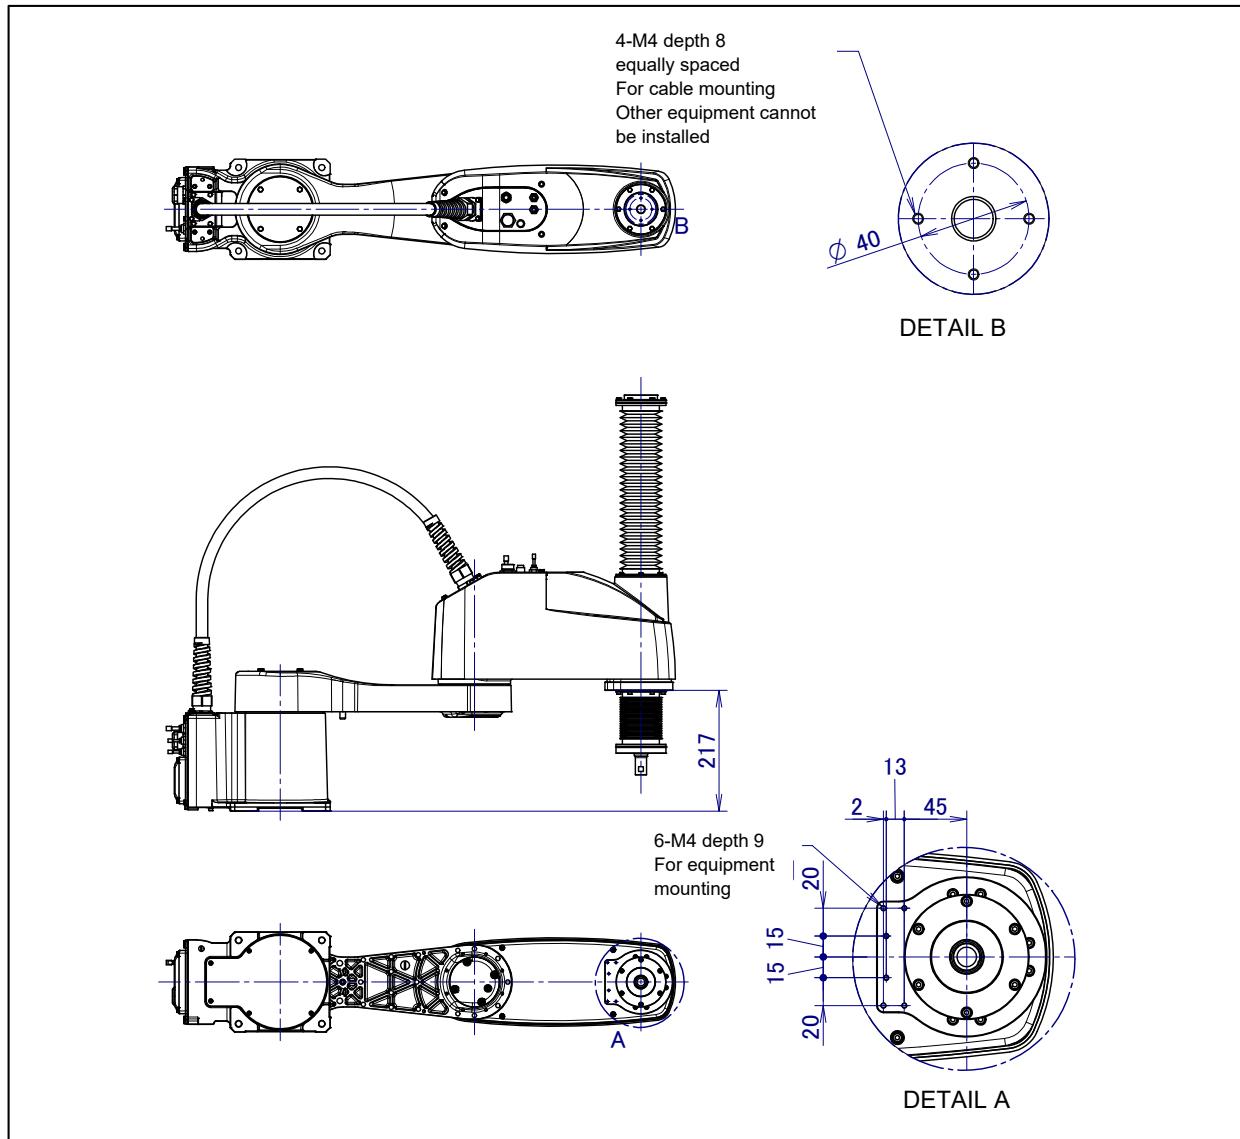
(d) Equipment mounting faces (SR-6iA/C)
